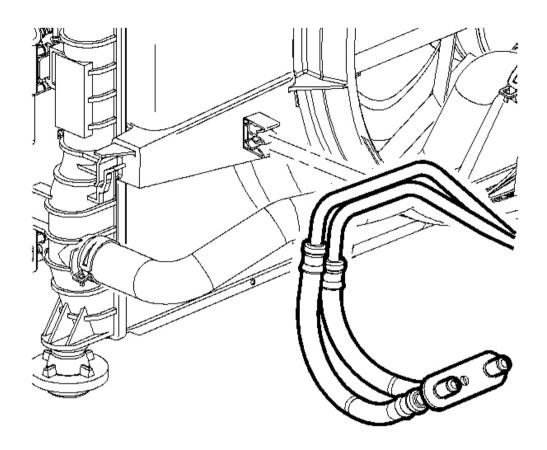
View Of Unclip Transmission Cooler Lines From The Fan Assembly Courtesy of GENERAL MOTORS CORP.
